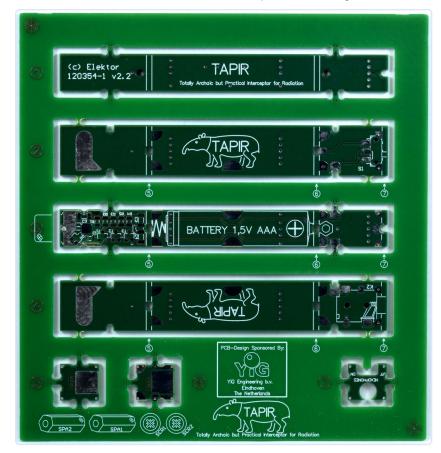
Top view of PCB breakout Panel 120354 v2.2 for the TAPIR E-Smog Detector.
